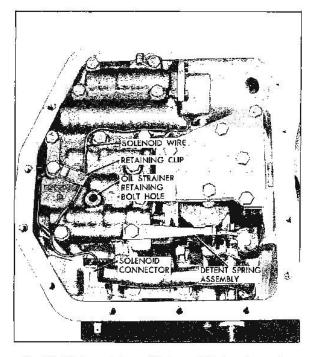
B-50 Transmission - Oil Pan and Strainer Removed
